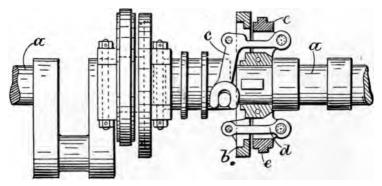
Mann heavy-freight steam vehicles. Patent single eccentric reversing gear.
